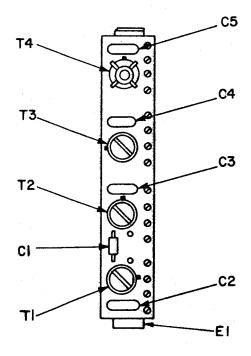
27 MHz Subassembly A2A4A17, Component Locations
